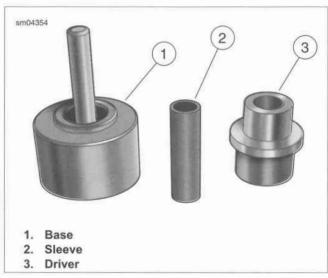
Rear Wheel Compensator Sprocket Bearing Remover/Installer (Part No. HD-48921)
